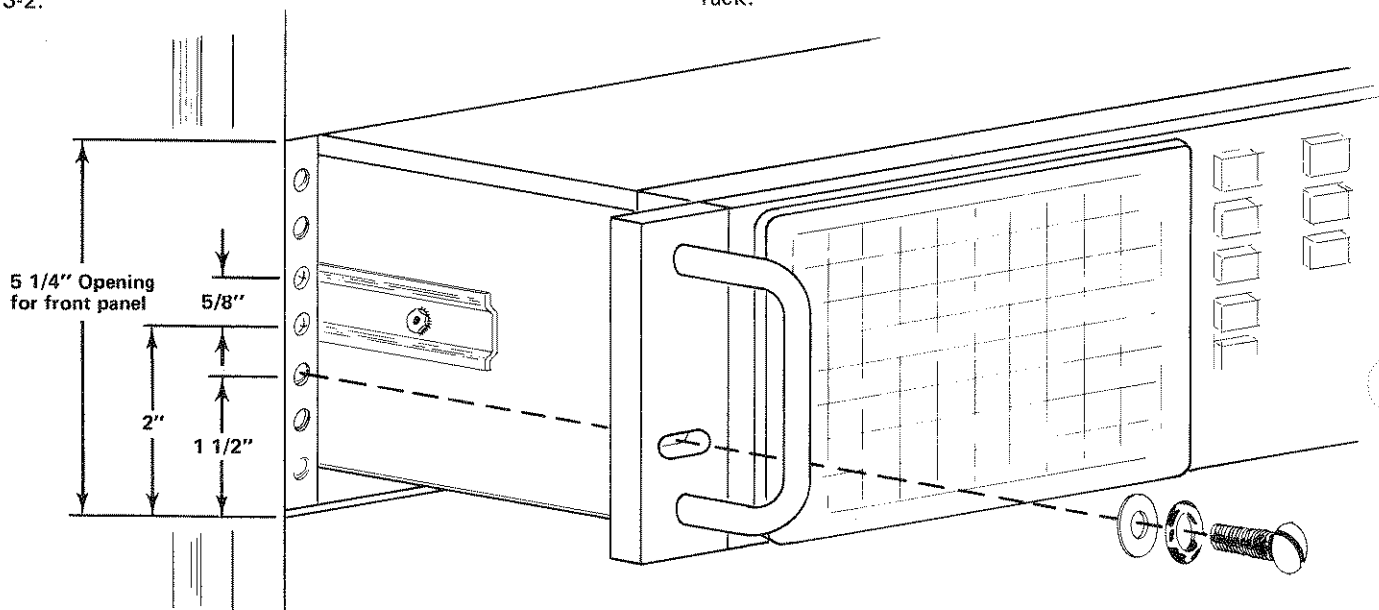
Vertical mounting position of the left stationary section and location of the thumb screw securing hole. These same dimensions apply to the right front rail.
